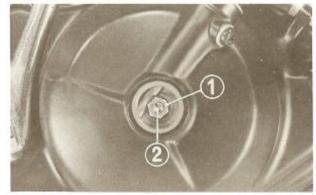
(1) Lock nut (2) Clutch adjuster
